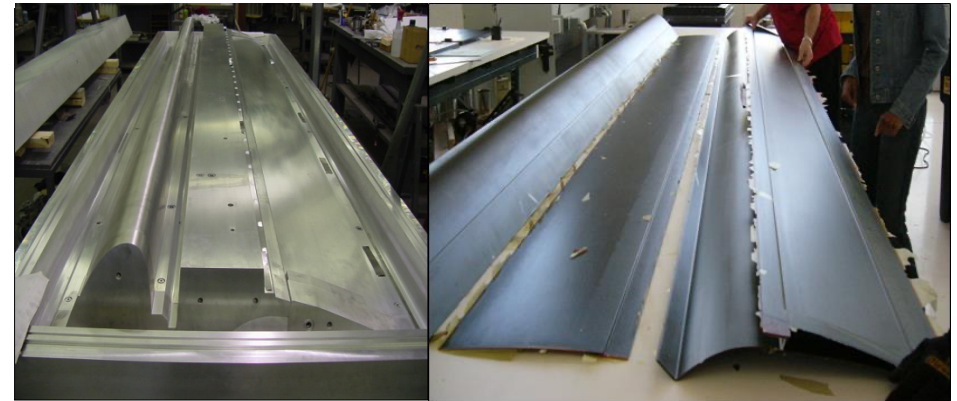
Boeing 787 SQRTM Leading Edge Slats Tooling and Parts.
